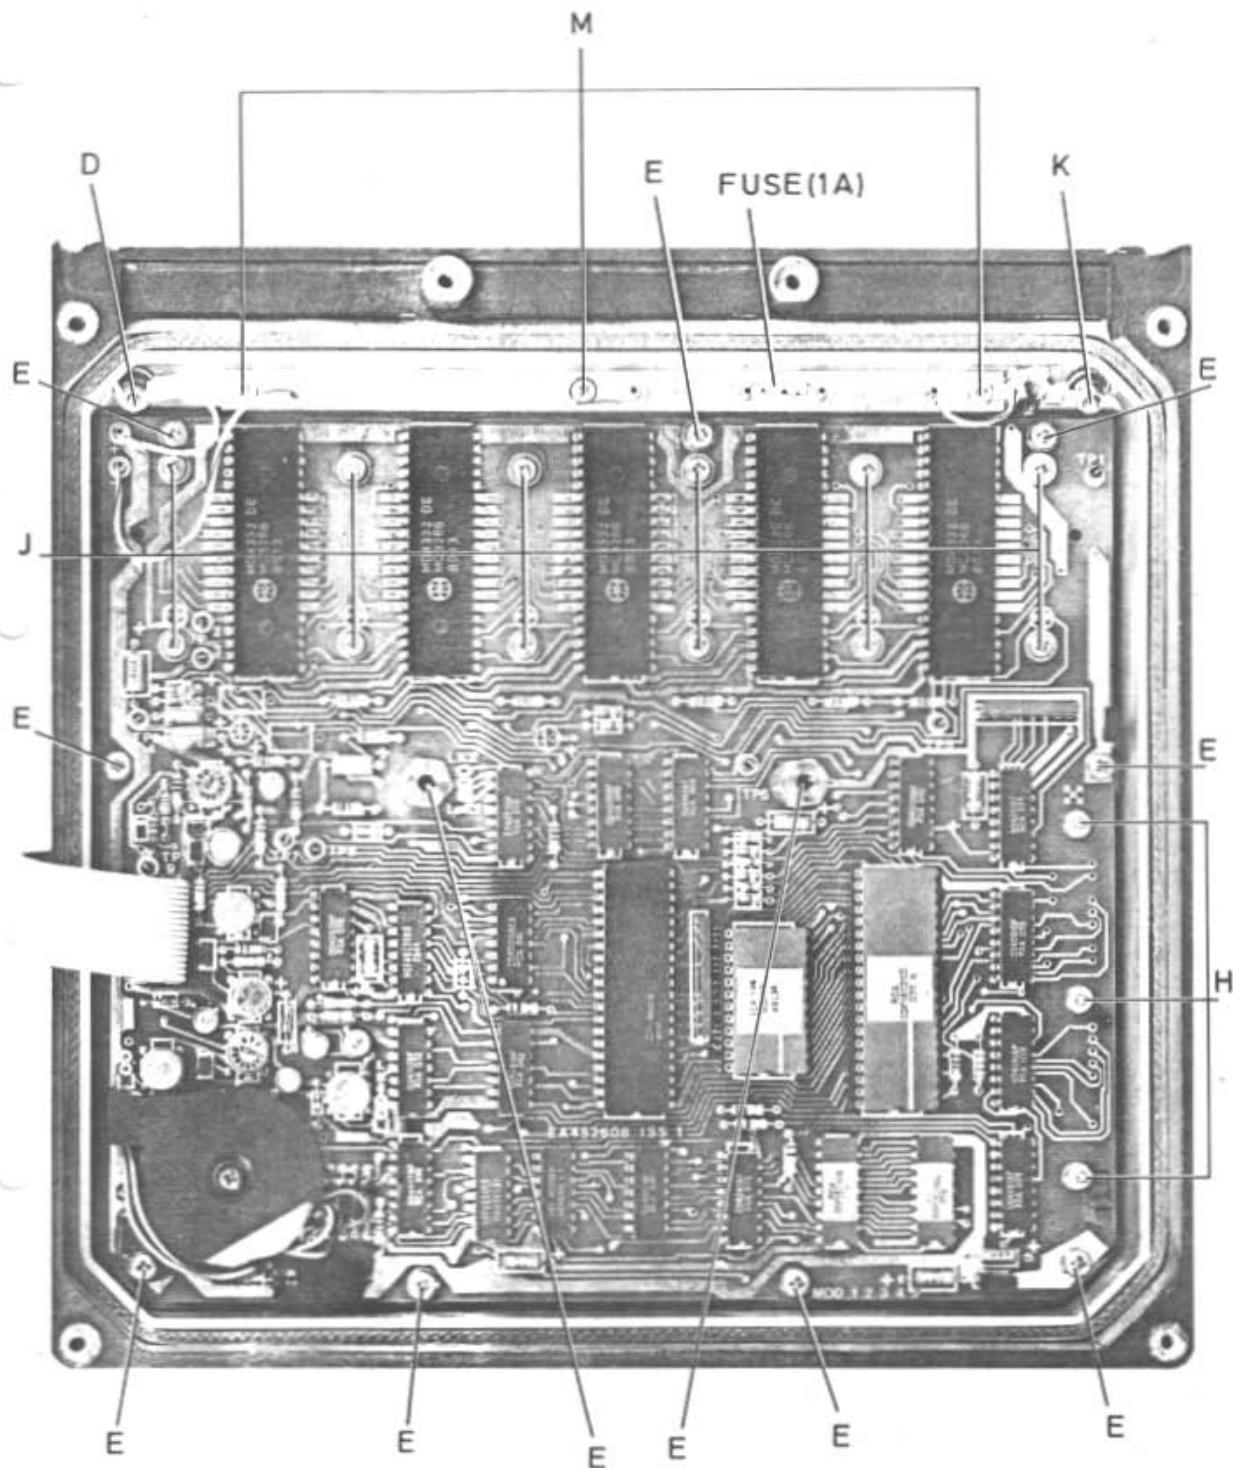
Removing the Man/Machine Interface Module Assembly (452635)
